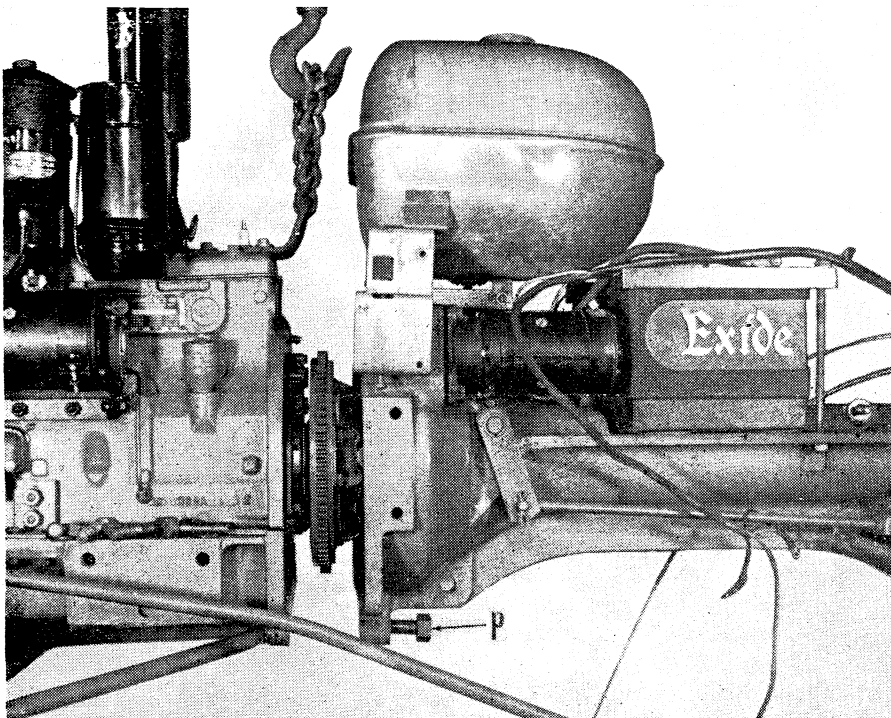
Splitting Pony tractor for clutch removal. Note method of supporting engine and front frame. A floor jack (not shown) supports rear portion of tractor. (P) is front axle radius rod pivot bolt.
